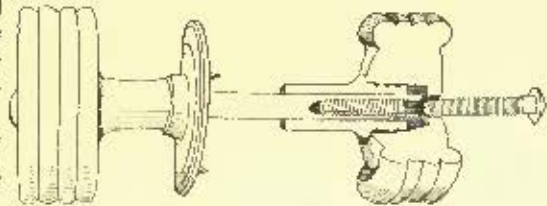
Hollenback's Expanding Spindle Door-knob.
